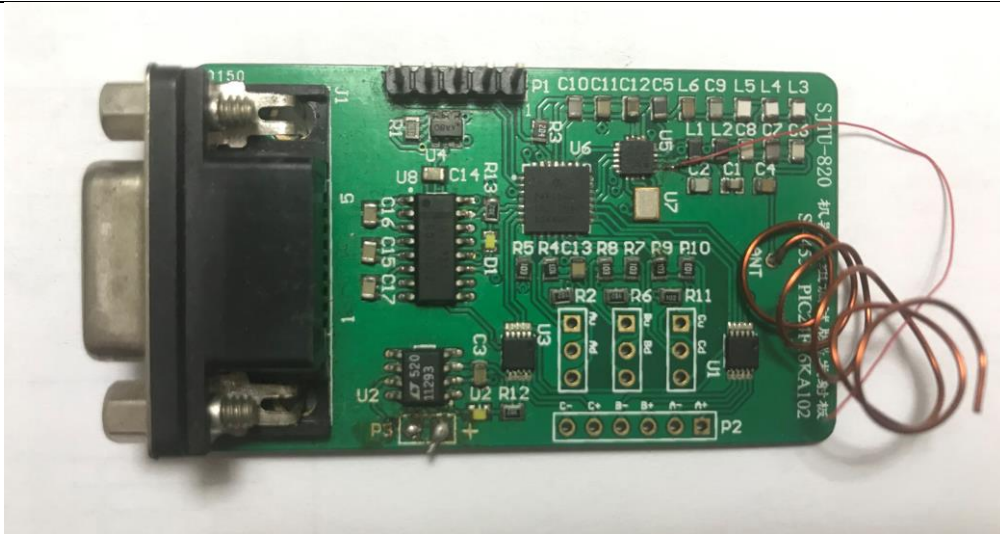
Completed PCB Board of the External Wireless Communication Module
